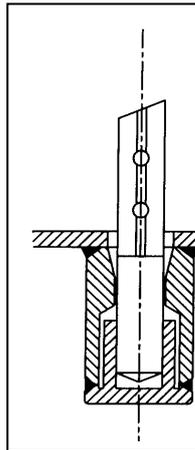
end support HTG-Sensor (two-part welding construction)
